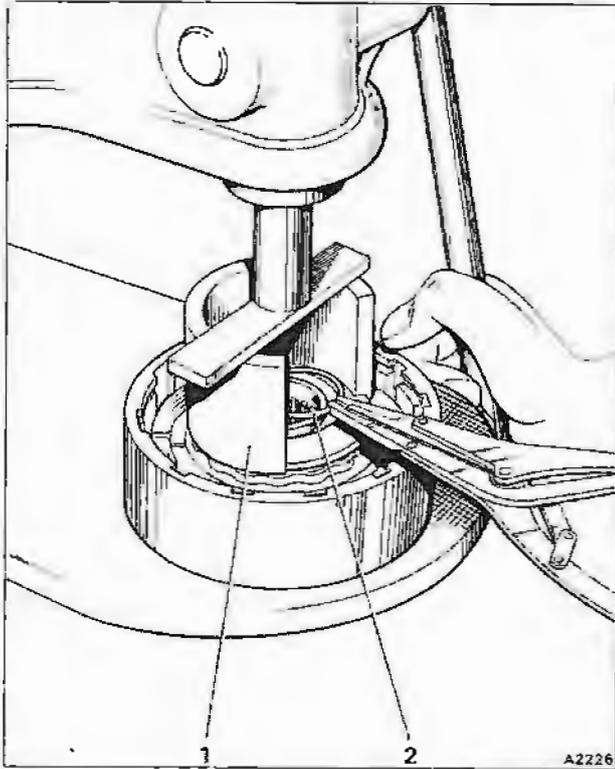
Removing and fitting the forward clutch housing snap ring
